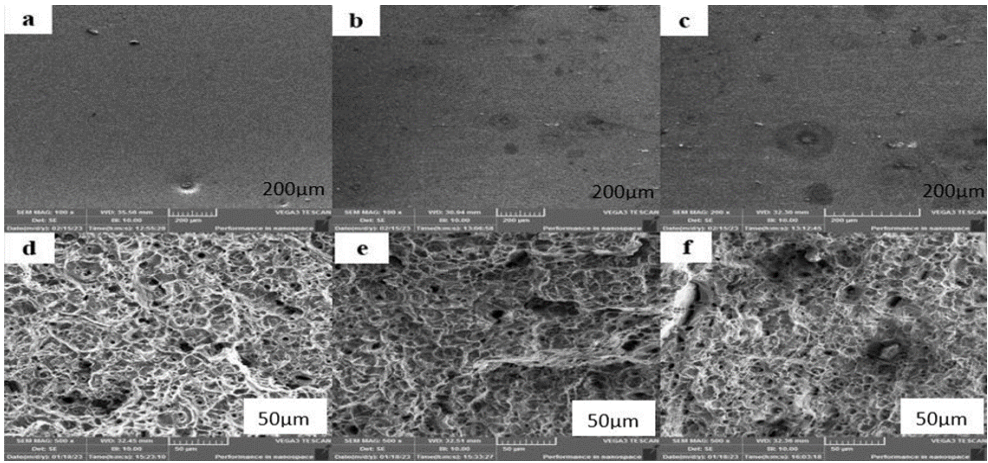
SEM images: (a) Similar weld 6061-T6(200µm) , (b) Similar weld 2024-T6(200µm), (c) Dissimilar weld(200µm), (d) Fracture surface of the Similar weld 6061-T6(50µm), (e) Fracture surface of the similar weld 2024-T6(50µm), (f) Fracture surface of the dissimilar weld(50µm)
